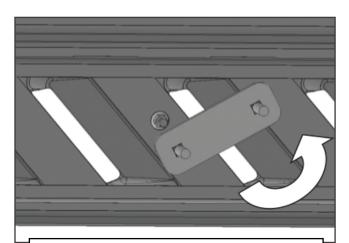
Example of driver/left rear mounting location without threaded holes. Insert Bolt Plate into oval hole and out forward hex hole (arrow). Also see Figs 3 & 4
